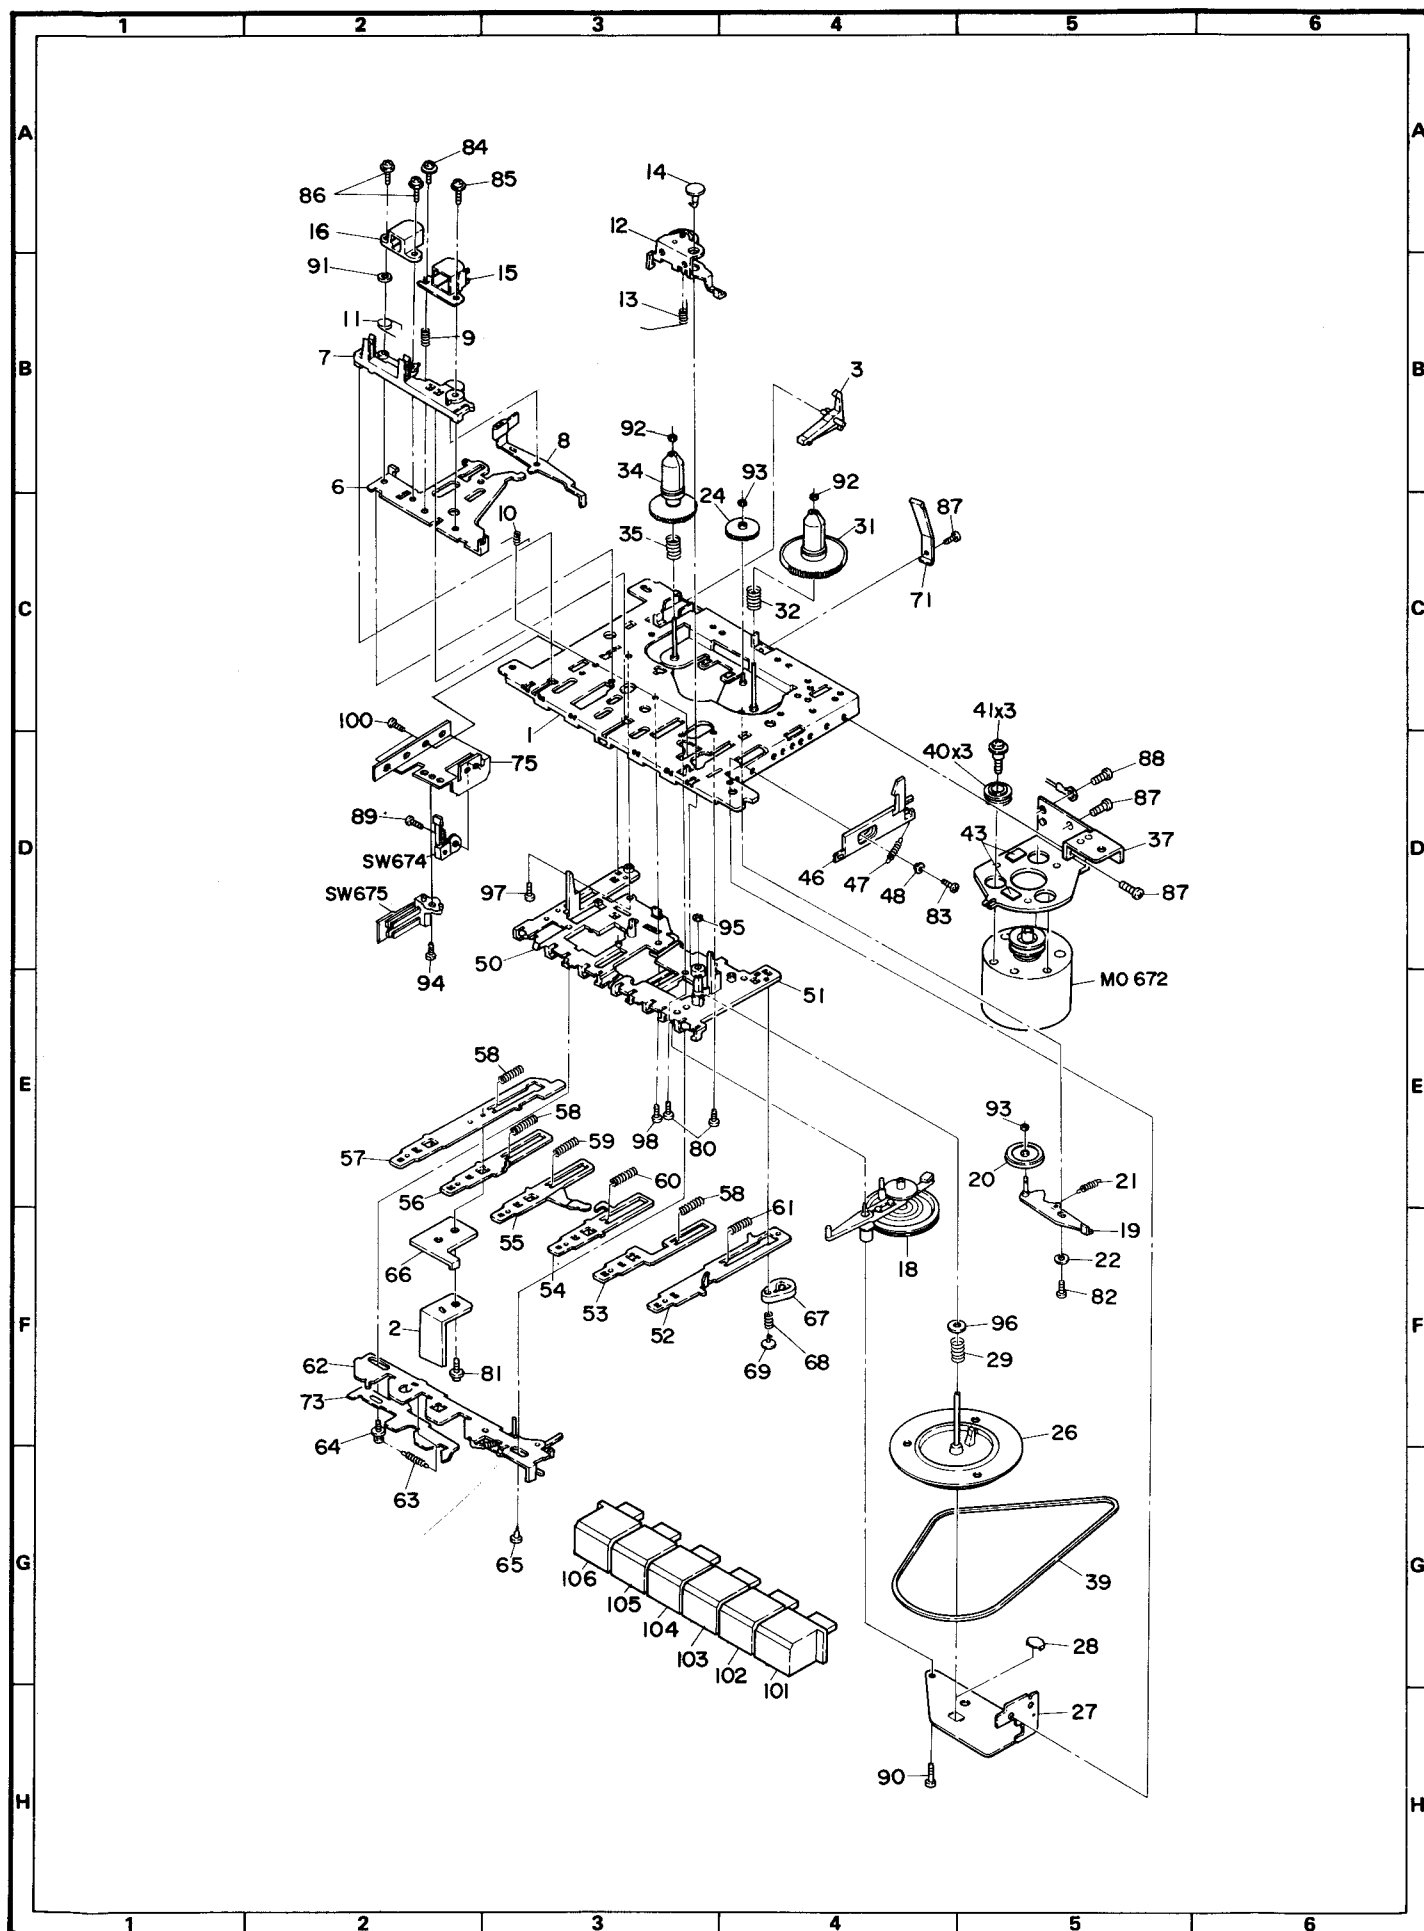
DECK 2 MECHANISM EXPLODED VIEW
